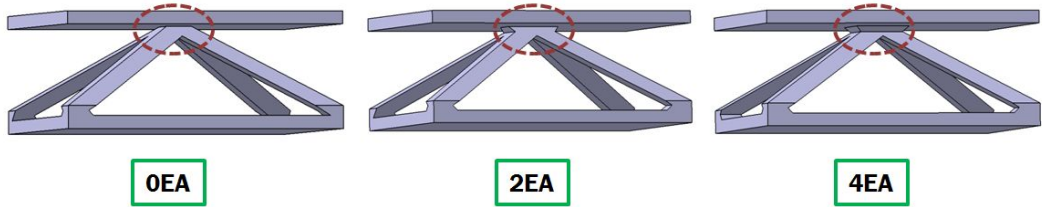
The area of welding of initial imperfections on the weld zone
